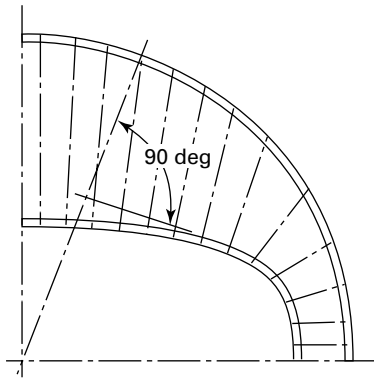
STAYED WRAPPER SHEET OF LOCOMOTIVE TYPE BOILER
